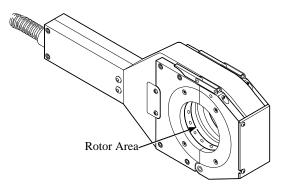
Inspect Exposed Surfaces of the Weld Head
